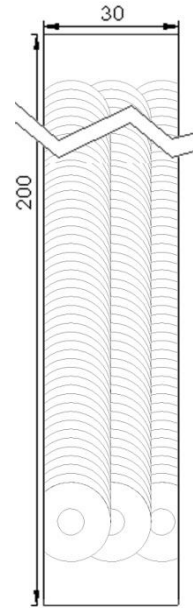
Bending runs set-up and composite test samples dimensions.
